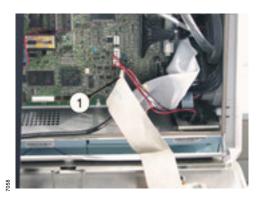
Detail view of Central Control Board: Cable connector (ribbon cable)
